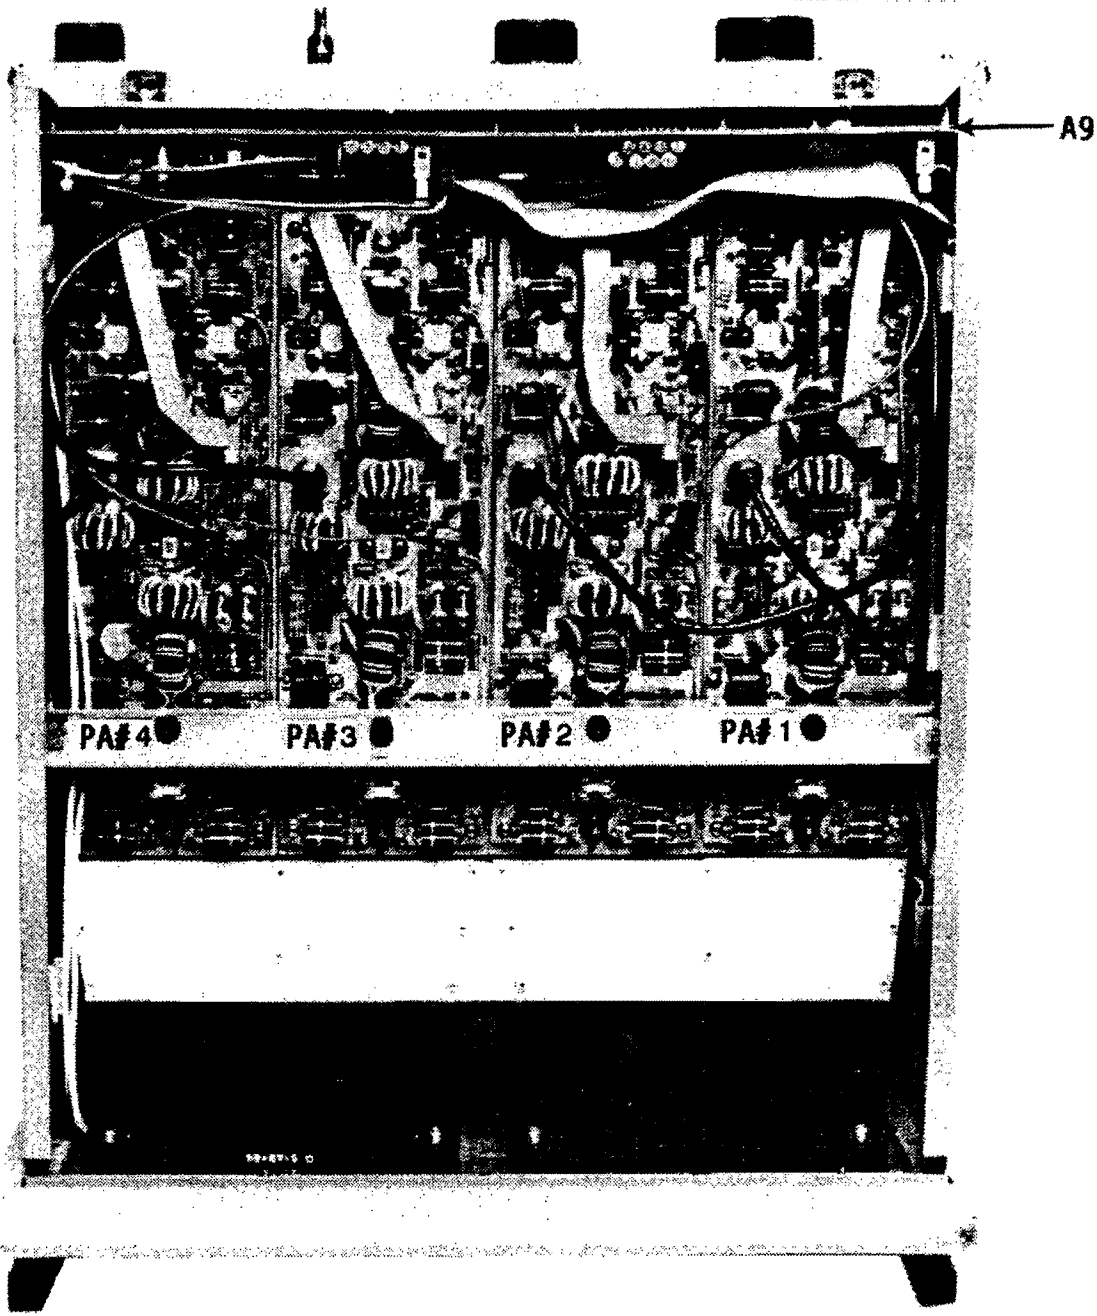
(Sheet 5/8) Major Assembly Locations.
